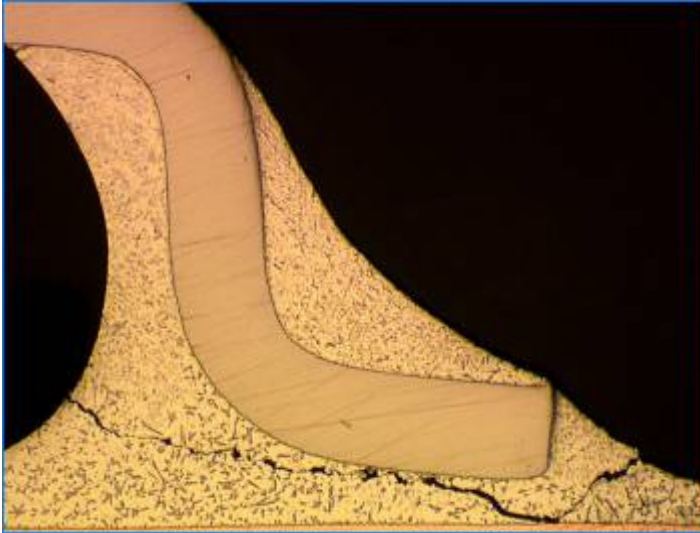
cross section, SN66, U61, right lead solder crack, 100x
